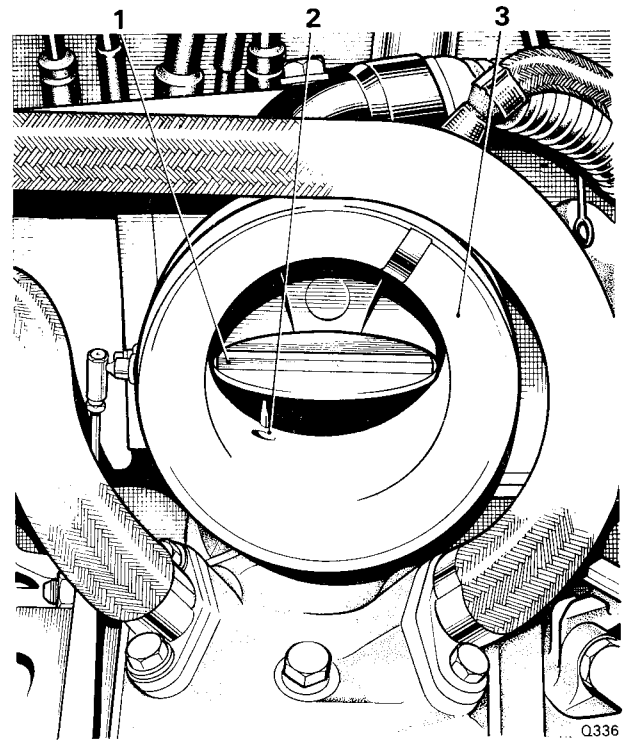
HOT IDLE MIXTURE COMPENSATOR FEED
